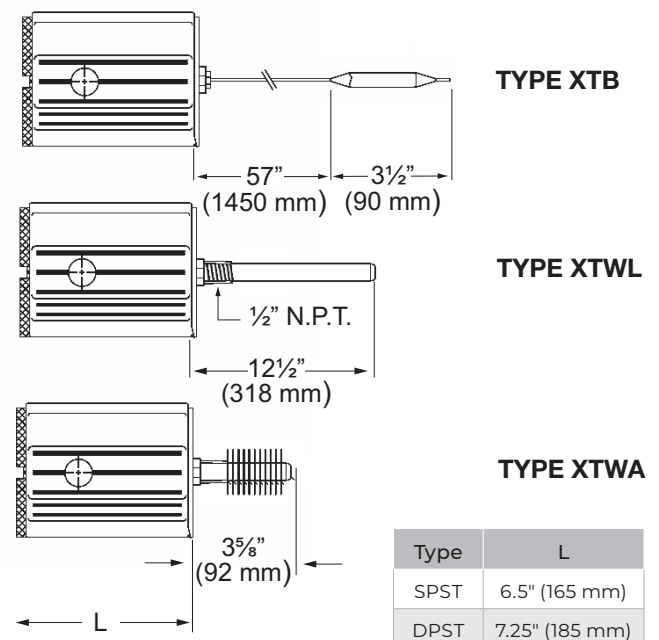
Norseman™ Explosion-Proof Thermostat Dimensions
